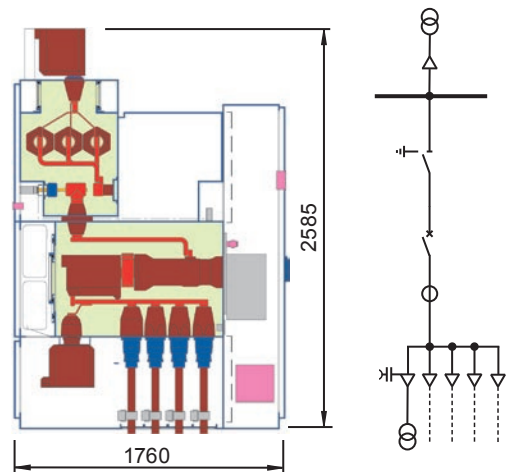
Integrated busbar measurement (example for measurement of the rear busbar)
